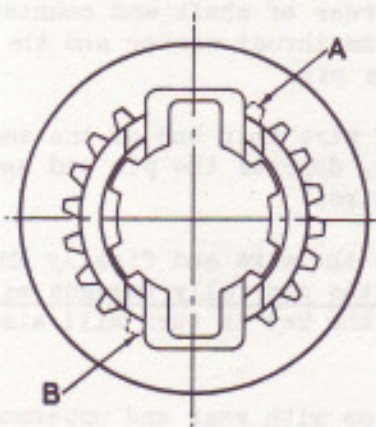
REAR END VIEW OF SLIDING PIECE.
